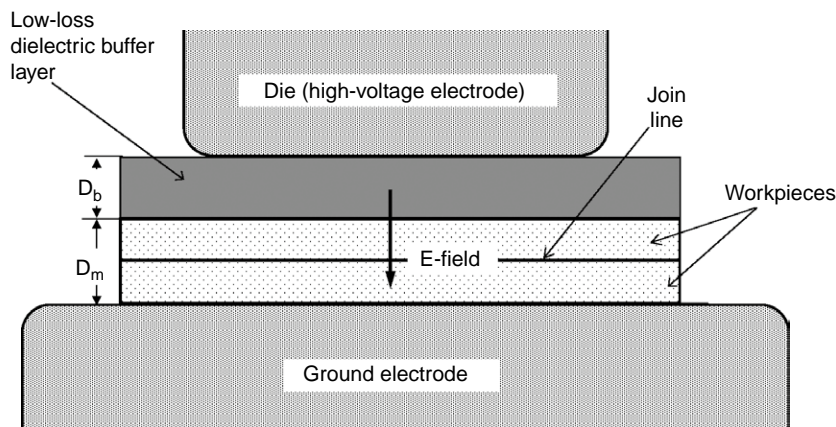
RF welding with a buffer layer to prevent arcing.
